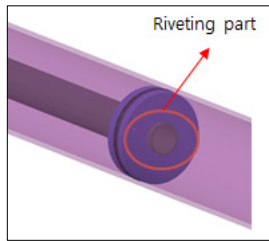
Riveting part of the hollow piston rod (φ8-φ4)
